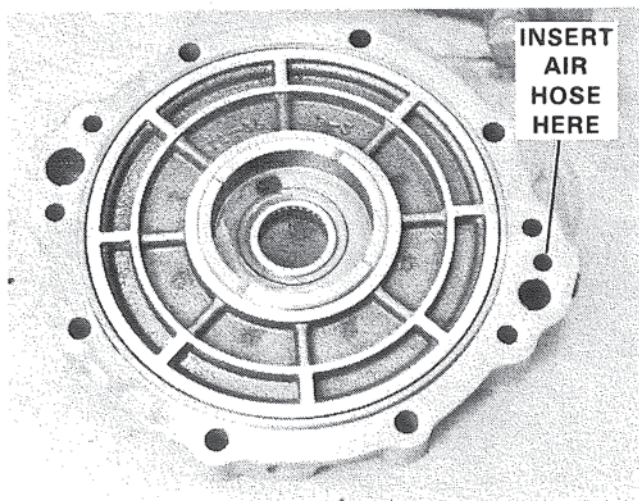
Disassembling Reverse Clutch Piston from Adapter.
